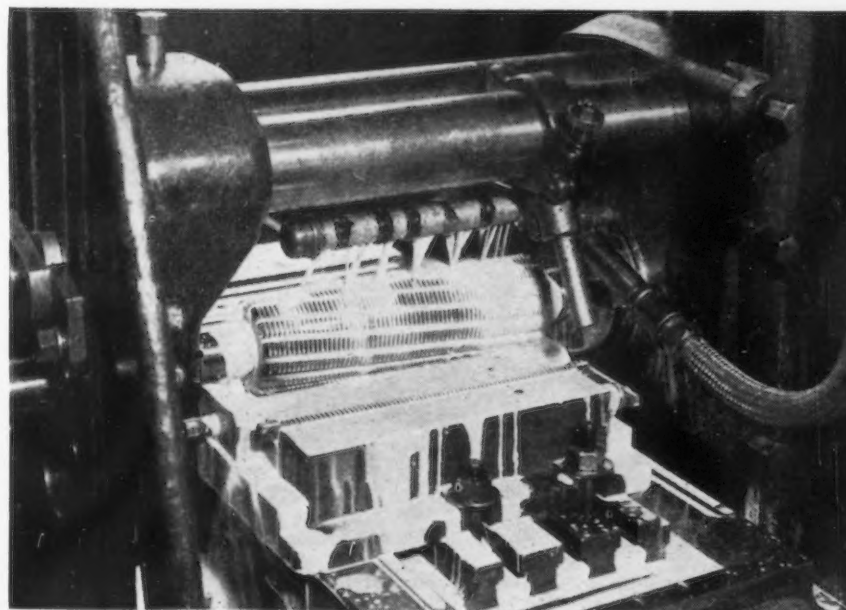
A special type of milling cutter is used to produce the notches in the beam of the "Speedweigh" scale.
